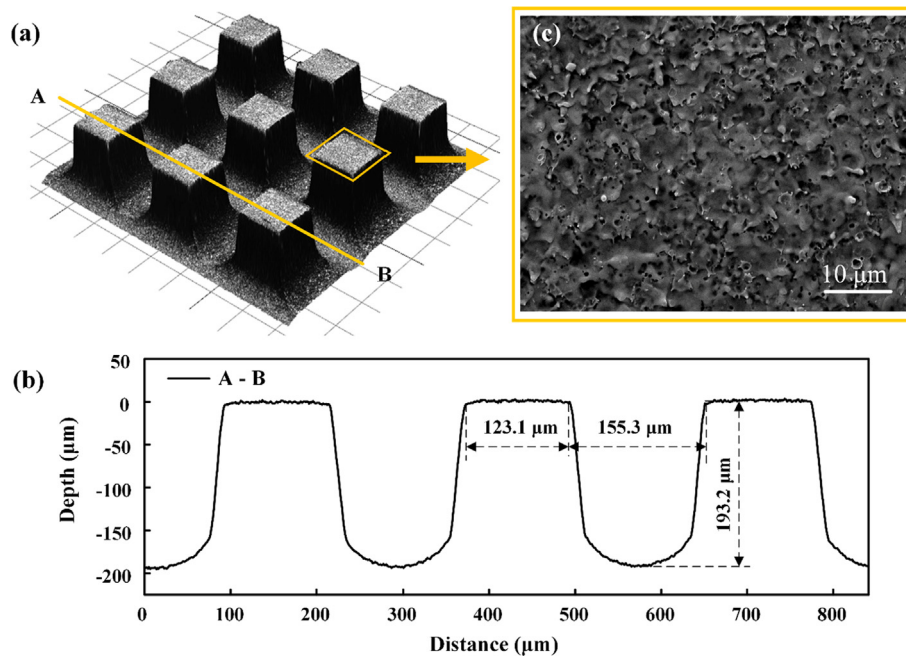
The WC-8 wt% mold core: (a) prism array microstructure; (b) the cross-sections profile of mold; (c) the surface morphology of mold after WEDM-LS.
